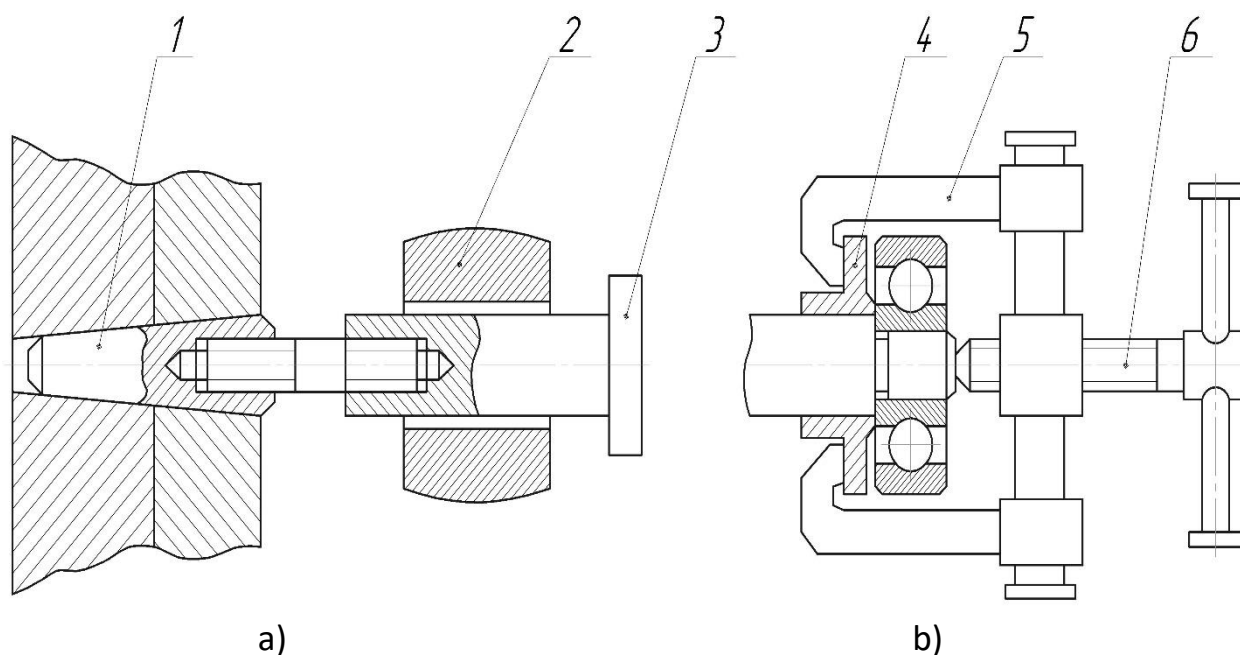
Removers: a – for dismantling threaded pins; b – for dismantling bearings, rings, bushings; 1 – pin; 2 – cargo; 3 – emphasis; 4 - detail, located behind the bearing (sleeve); 5 – clamp; 6 – screw
